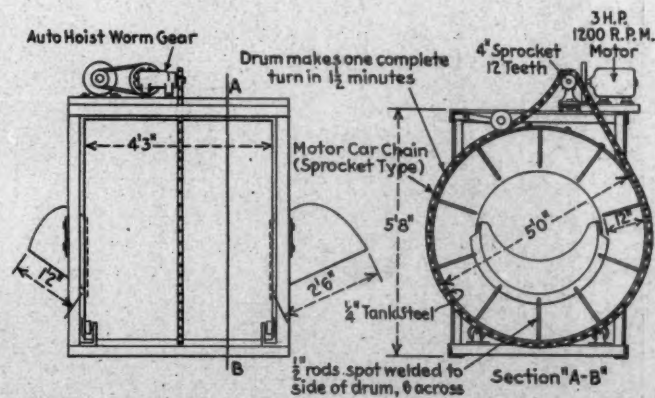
General arrangement and principal dimensions of the journal packing mixer
